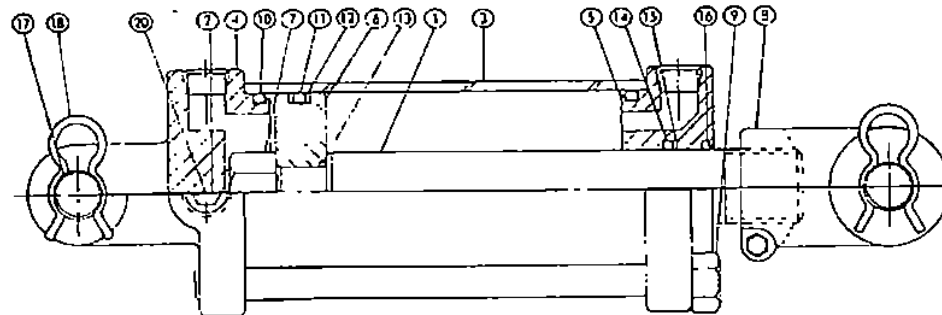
PRINCE HYDRAULIC CYLINDER 4" BORE MODEL PMC-9424
